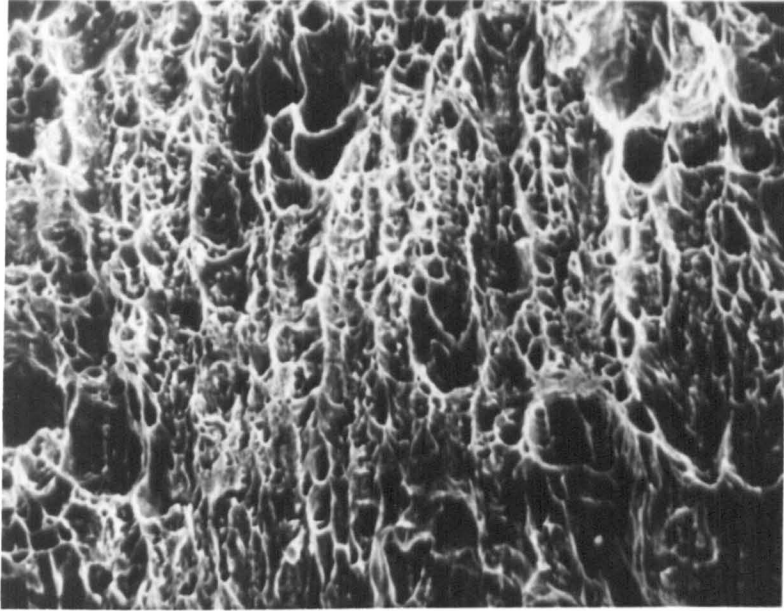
This SEM fractograph is taken about  $\frac{3}{4}$ -way-down the fracture surface of the specimen illustrated in Plate 11.15, ( $0^\circ$  tilt, 500 X). It shows mostly shear dimples with a quasicleavage fracture.
